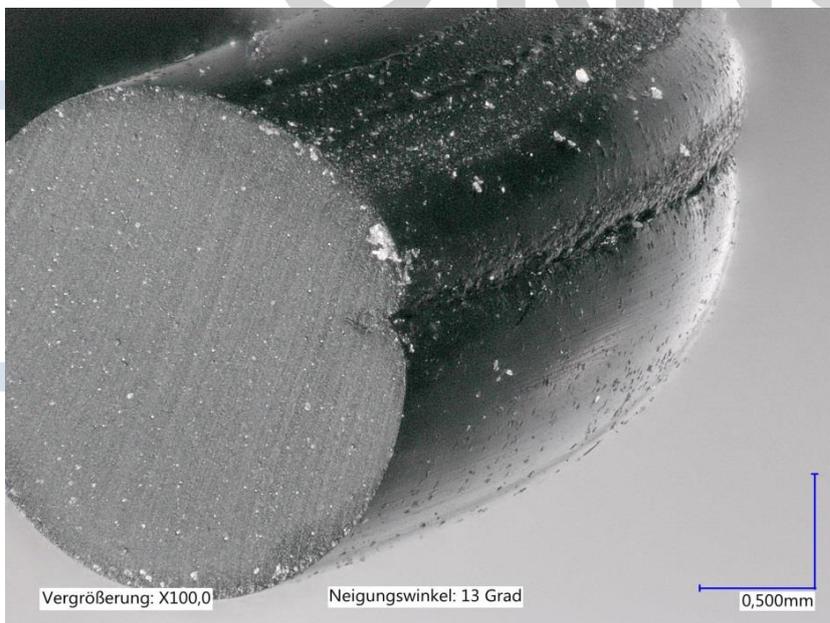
Cut caused by a sharp edge in a screw-in hole (outside diameter of the groove) of a hydraulic screw connection.
